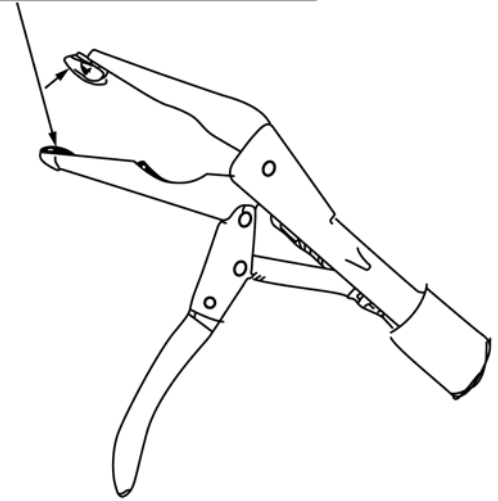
A 3/4-in. (19-mm) Diameter Clamp
